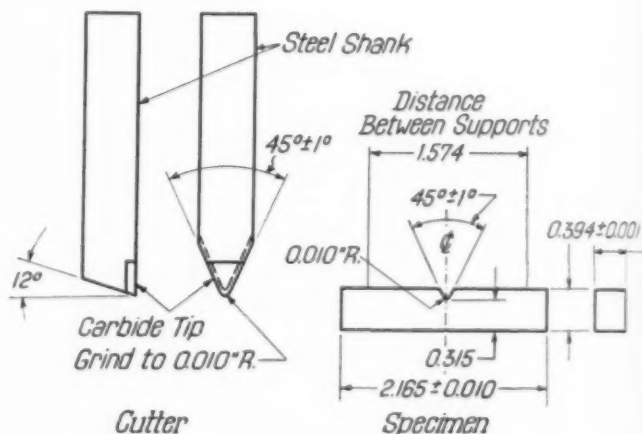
Charpy Impact Test Specimen With V-Notch and Carbide Tipped Tool for Milling Notch
